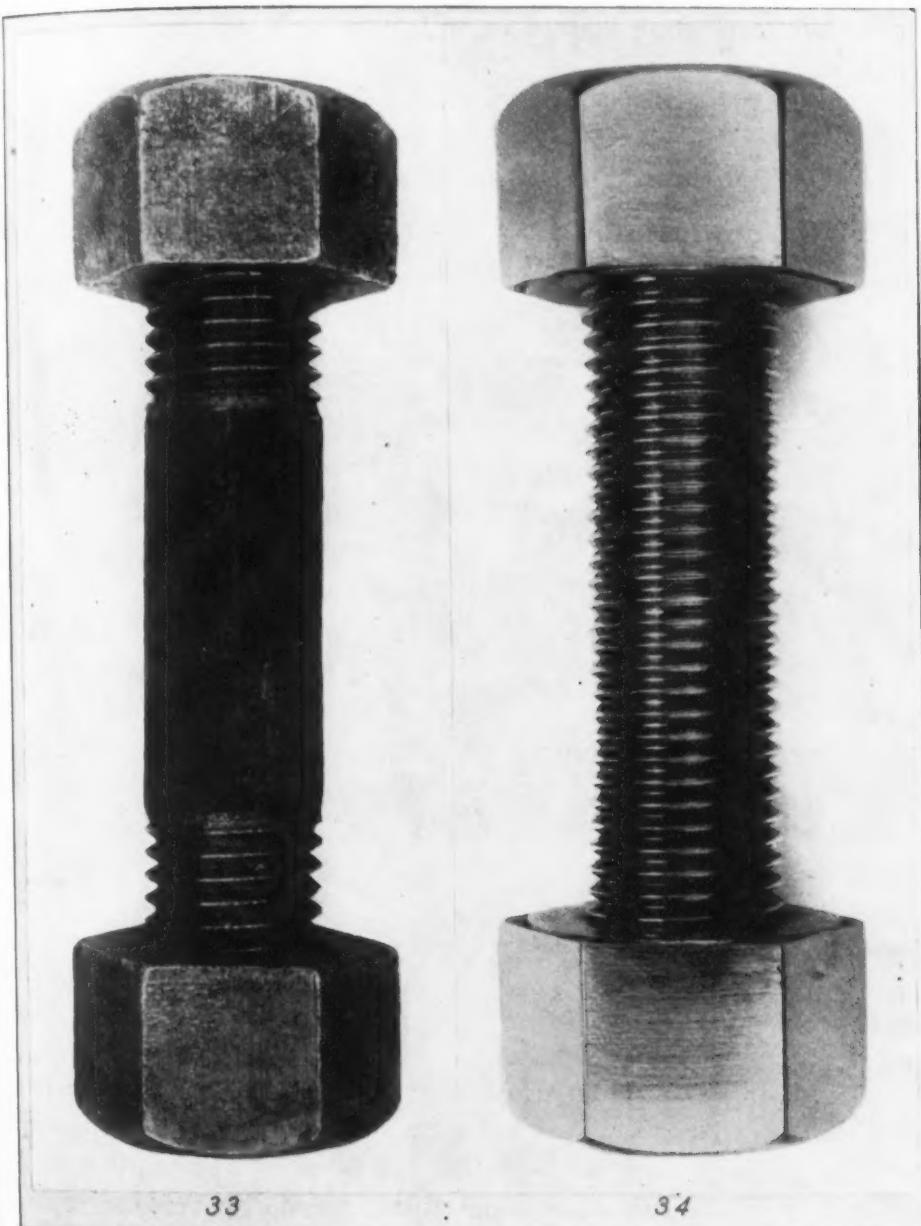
Photograph of Stud Bolt with Threads only on End and Cold-Punched Nuts.
